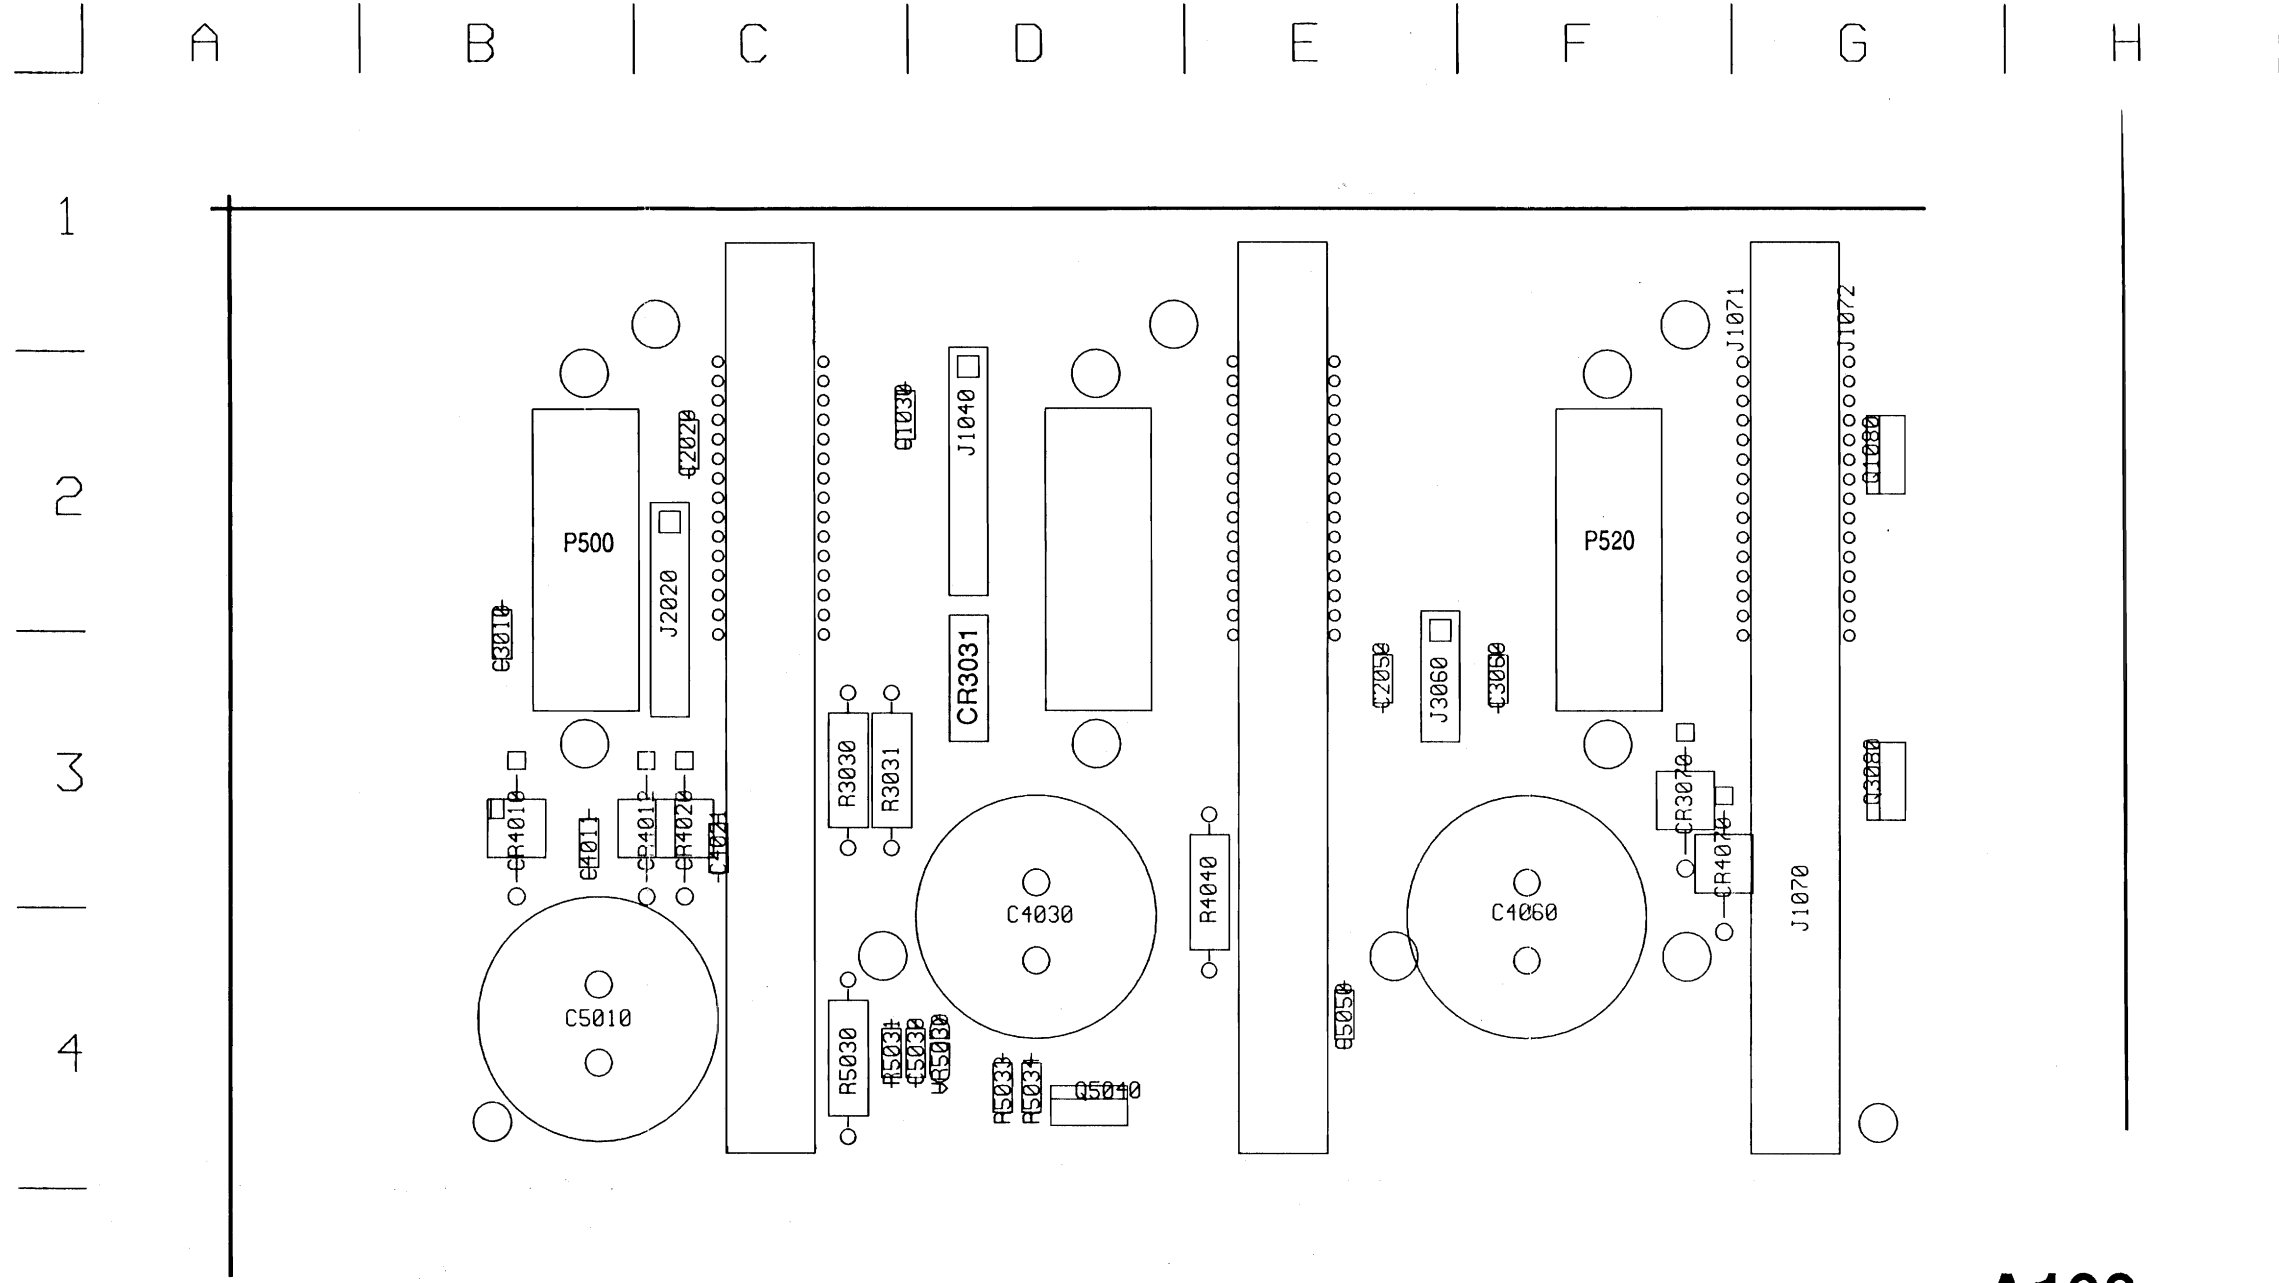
A100 - Power Supply Circuit Board Assembly.
